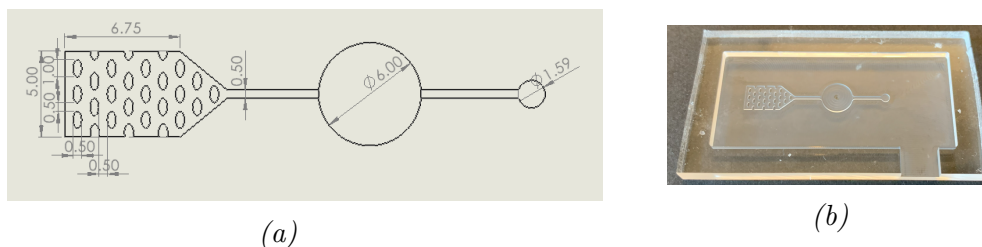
The technical drawing of the smaller BPS design with top view (a) and the created PMMA mold (b).
